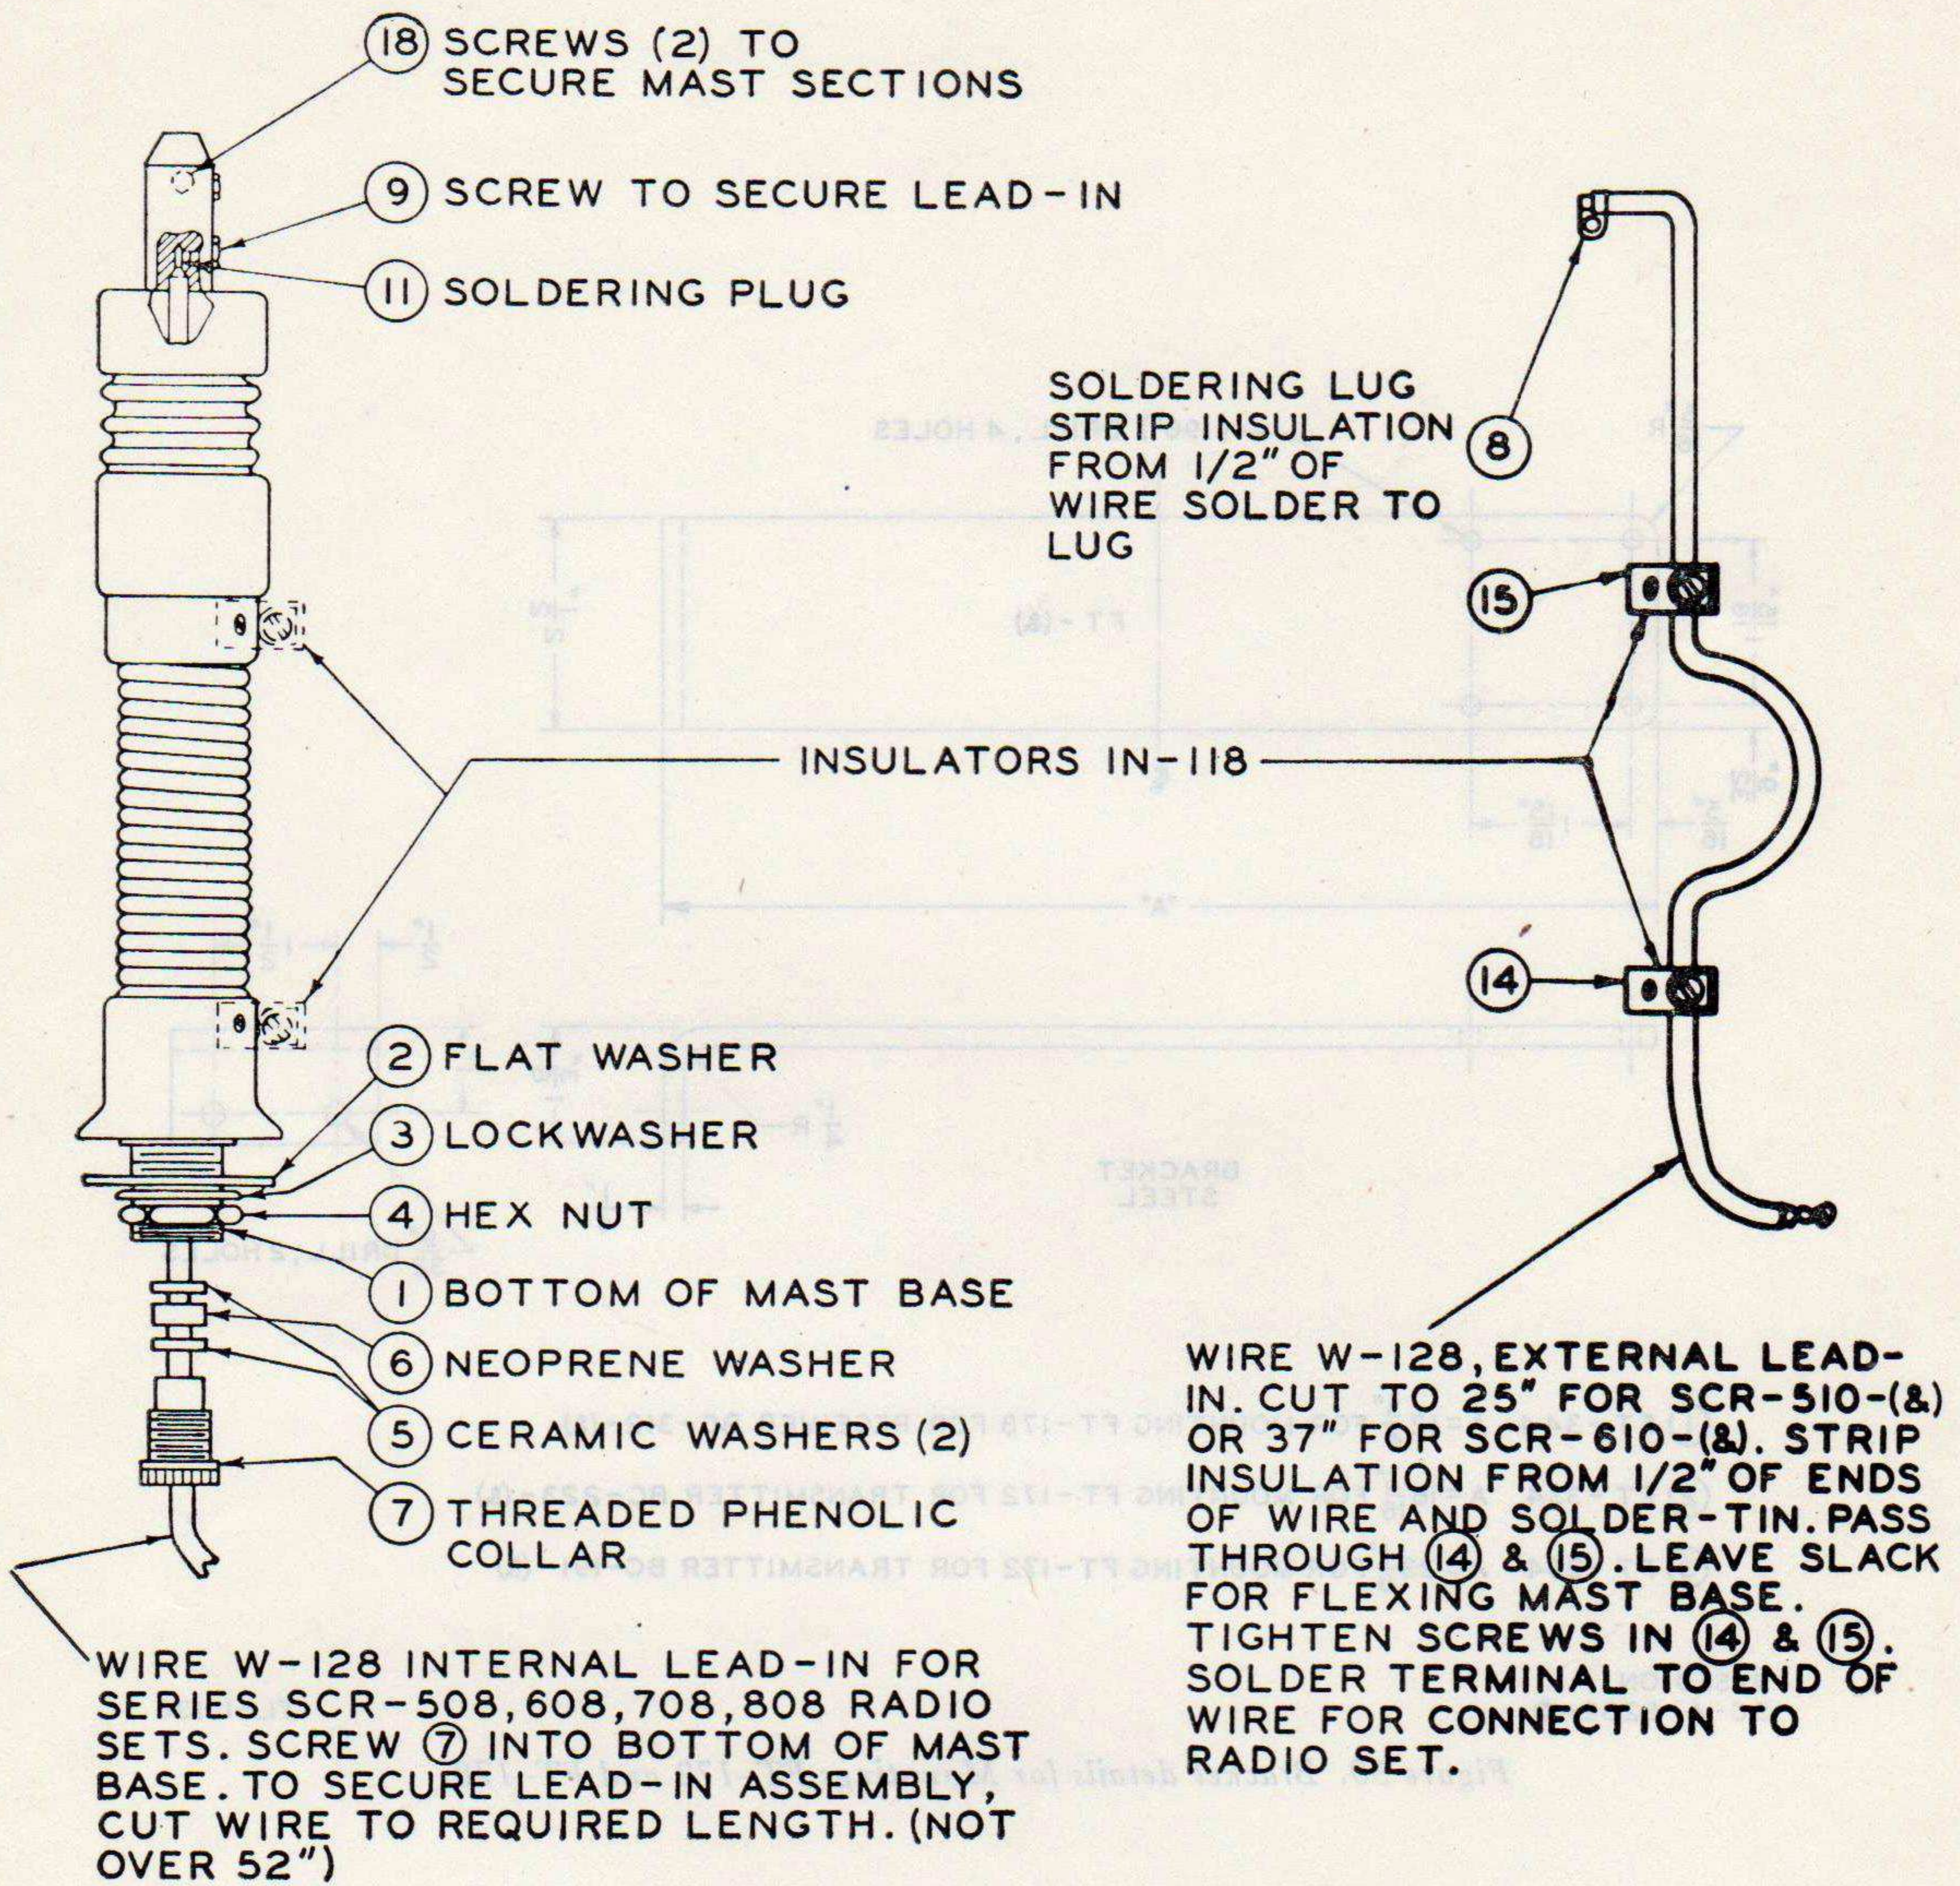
Mast Base MP-48-A, assembly with coaxial lead-in.
